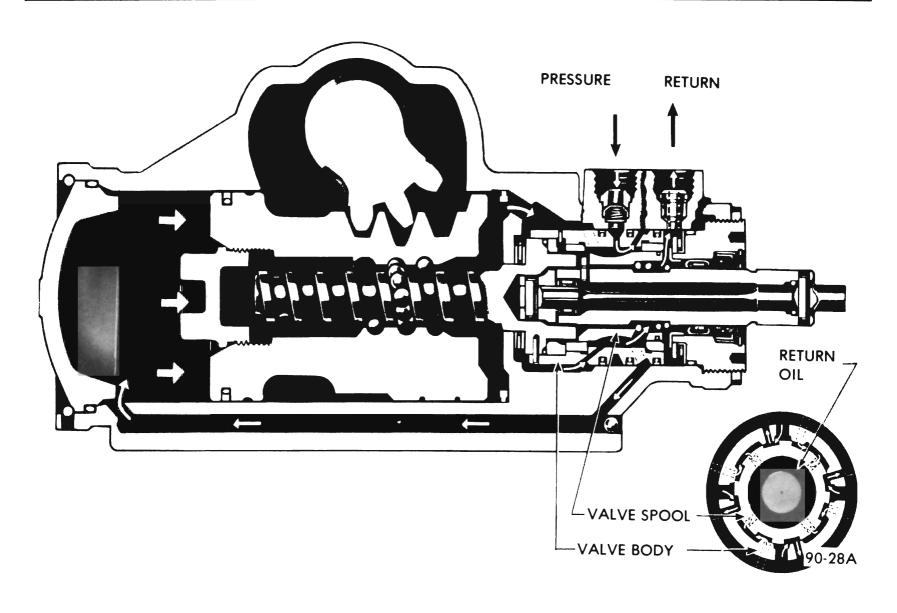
Oil Flow in Power Steering Gear (Right Turn)
